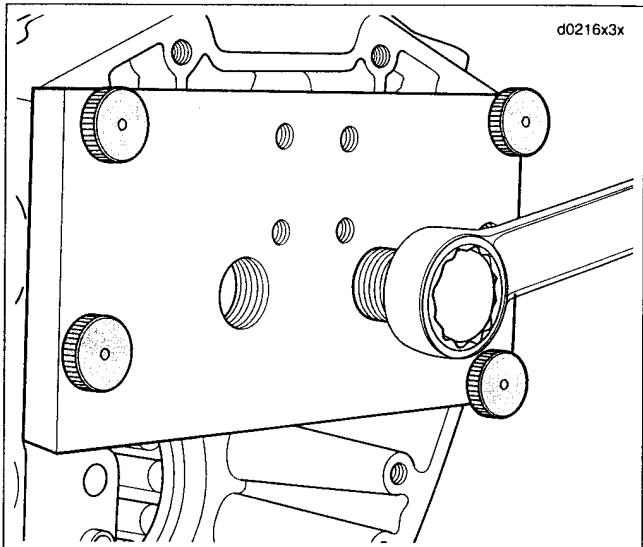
Turn Installer Shaft Clockwise to Install Bearing
